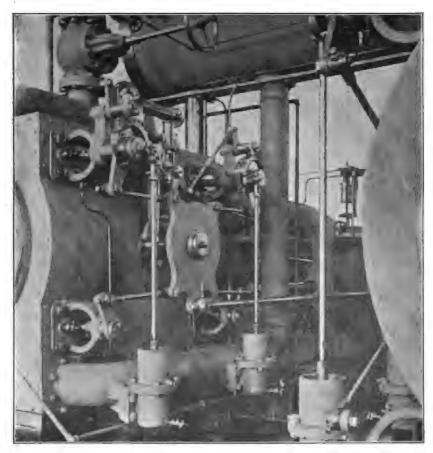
Extended Cut-off Gear, from the Snow Pumping-engine, Fig. 229.
